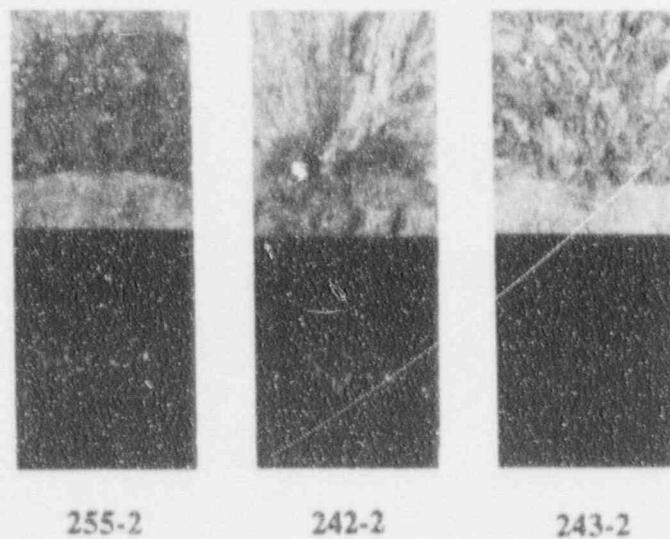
FRACTURE SURFACES OF J_{1c} SPECIMENS FROM 16-in. SWING ARMS
